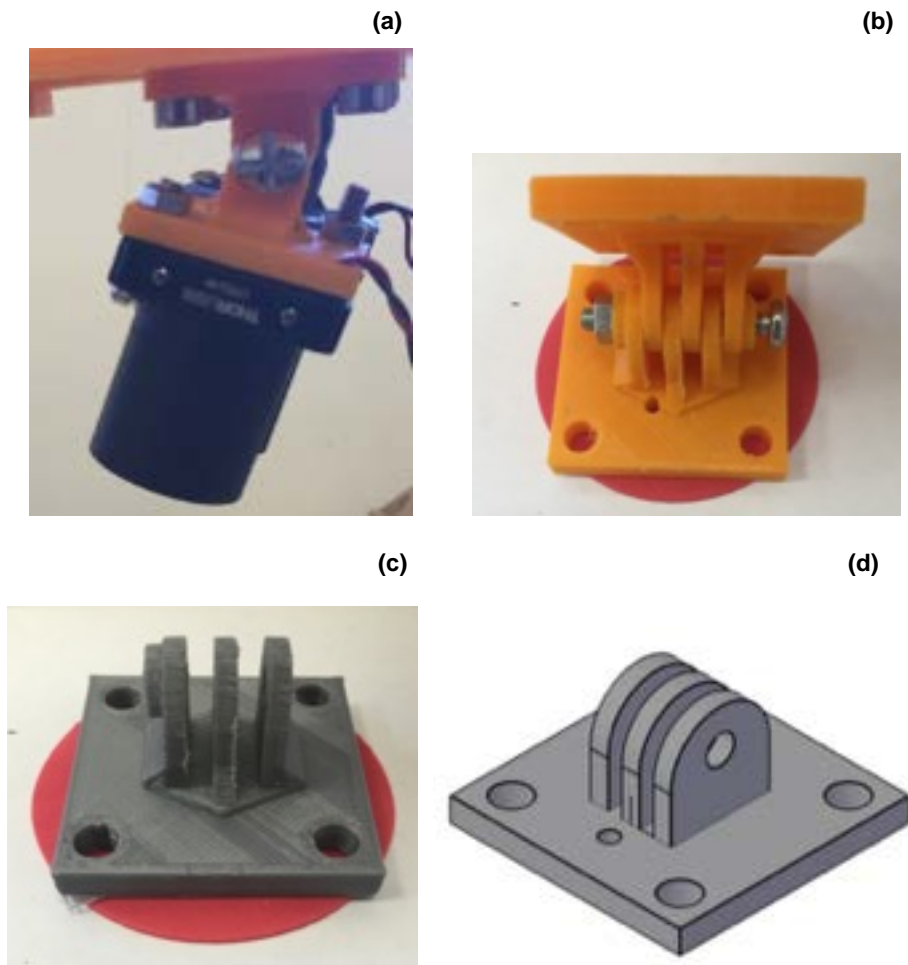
Mount structure for the LEDs to the base of the setup. (a) LED screwed to the structure. (b) The whole structure. (c) One of the parts that compose it. (d) CAD drawing of the figure
